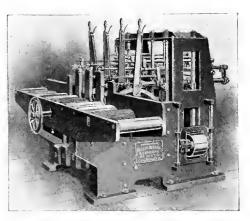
No. 306. Extra Range Horizontal Car Boring Machine.
